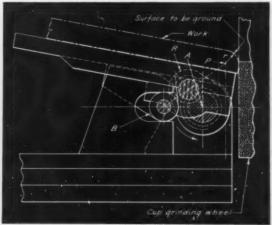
Enlarged view of rotating and tilting members of fixture shown in Fig. 1
